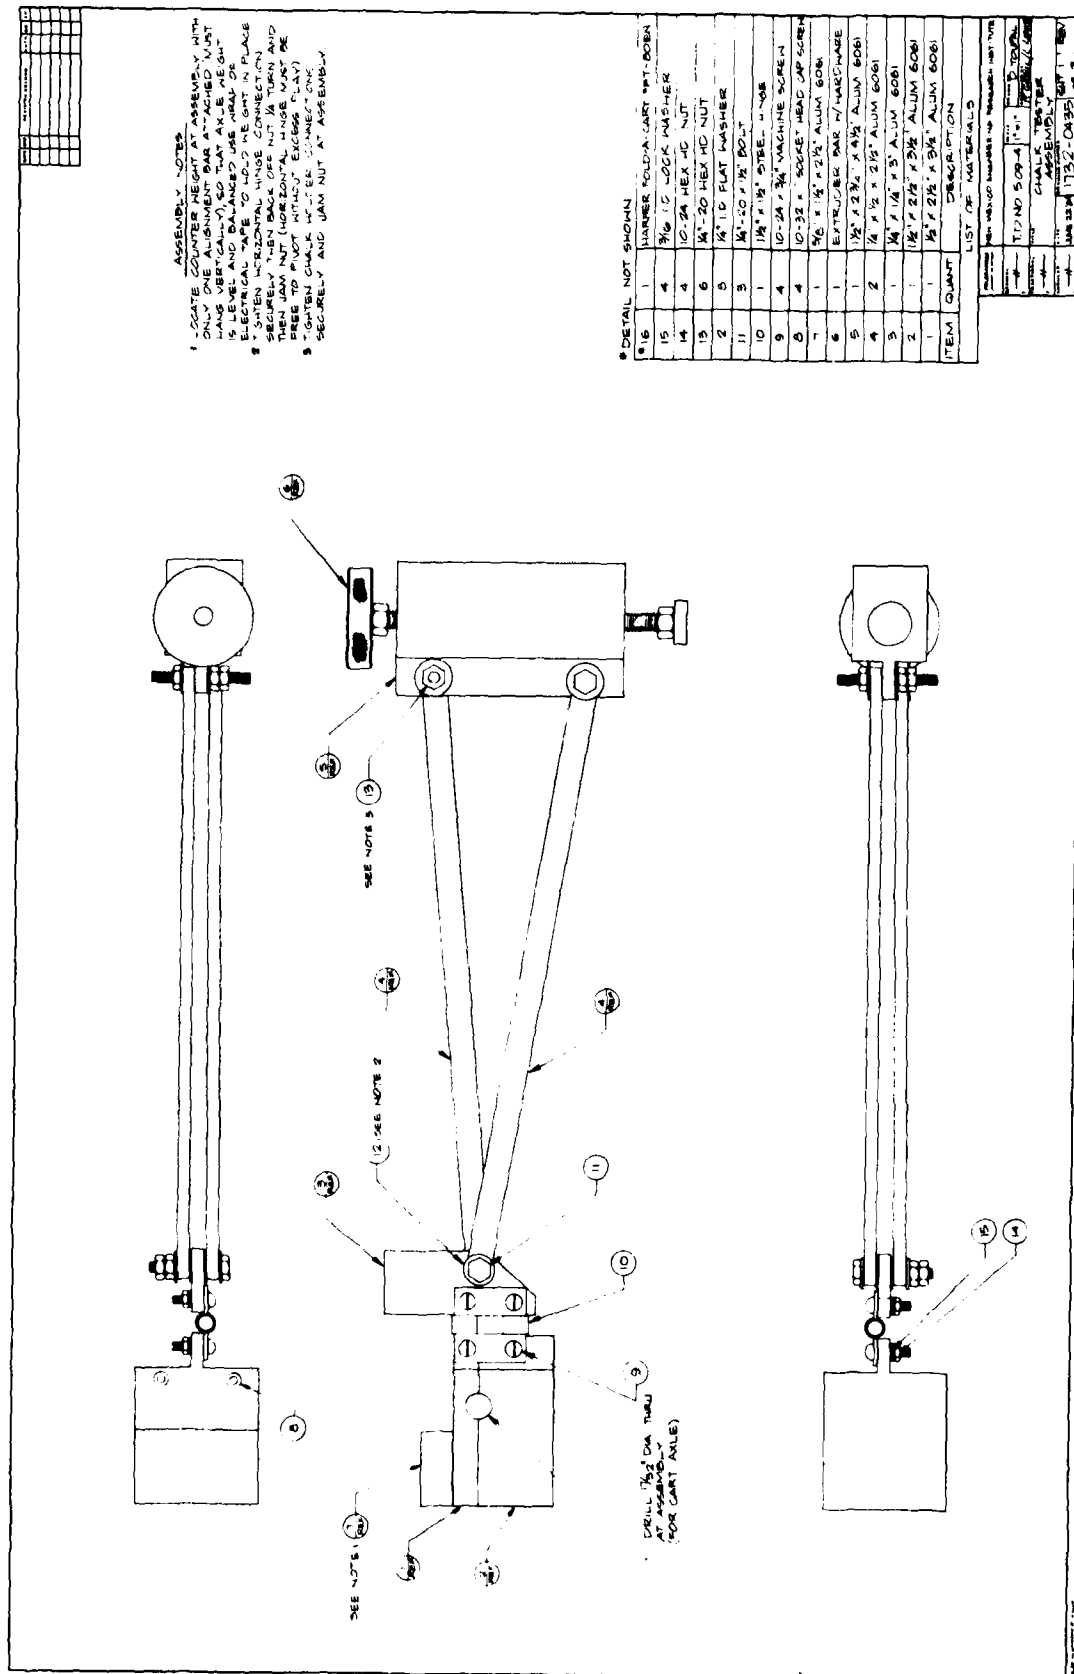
CHALK WEAR TESTER ASSEMBLY
